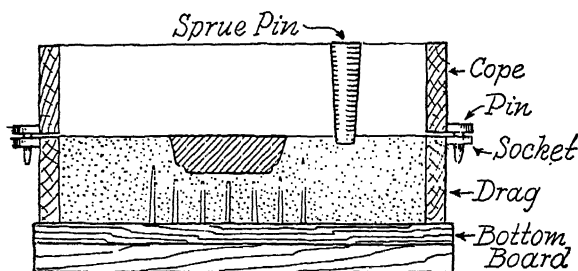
Drag turned over on bottom board, sprue pin located, cope in place and ready for molding sand
